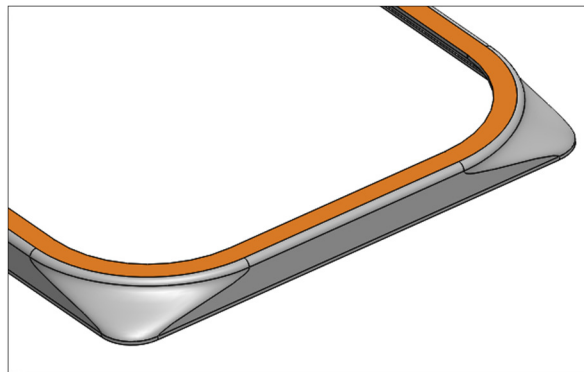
If a surface requires machining to reach a precision flatness or parallel tolerance, additional stock equal to 0.25mm should be added.
